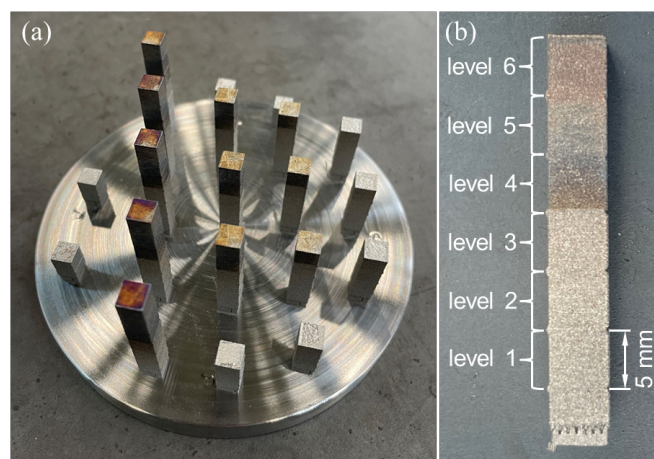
(a) As-built specimens on the build platform and (b) side view of a specimen after removal
